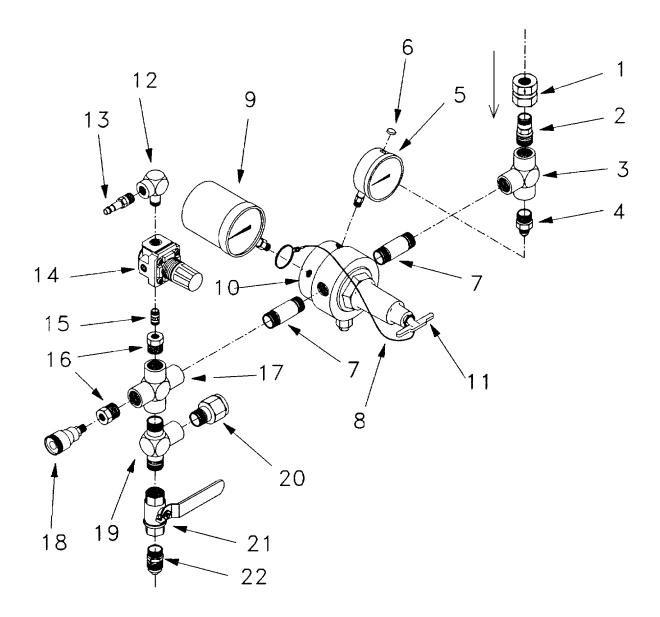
LOW PRESSURE REGULATOR ASSEMBLY (PA005)
